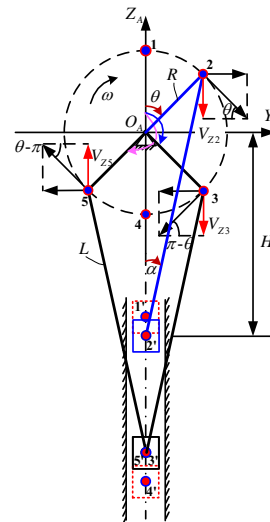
The crank-connecting rod mechanism of gear shaper machine.
